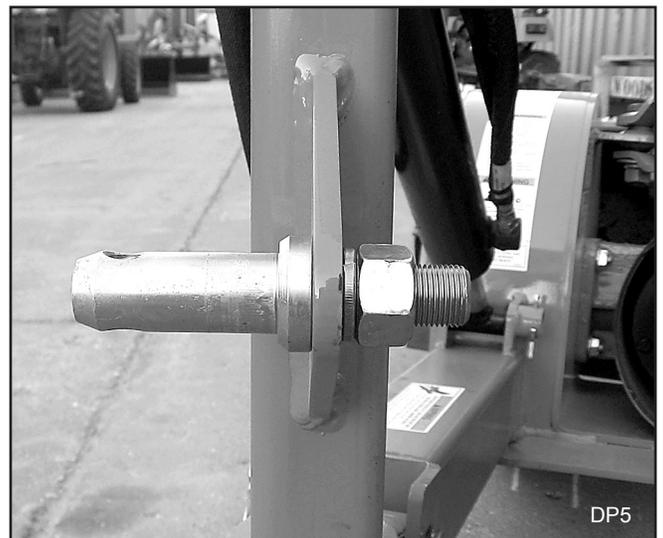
Cat 2 Hitch Pin Installed - Right Side Shown
